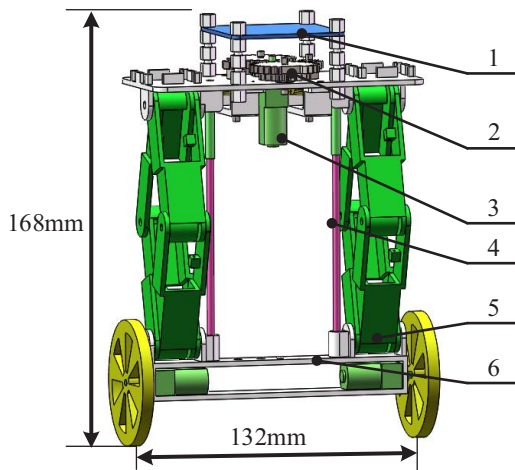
CAD model of the two-wheel and hopping robot: 1-Control panel 2-Gear train 3-DC motor 4-Guide bar 5-Four-bar linkage 6-Wheel frame
